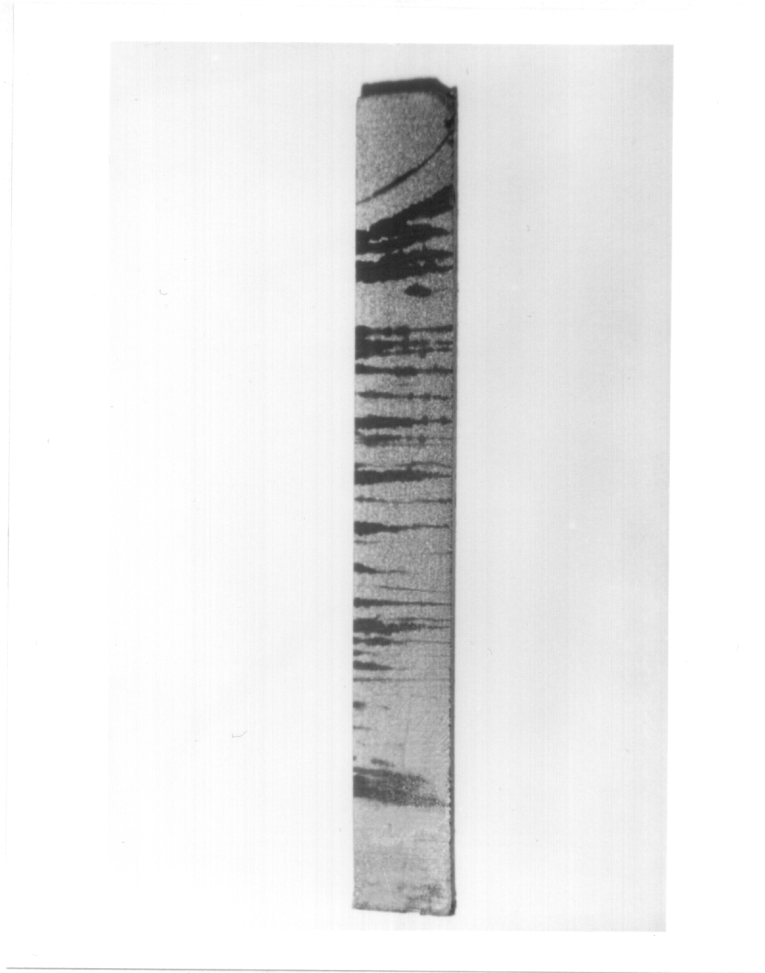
Liquid Penetrant Inspection of a Tensile Specimen
